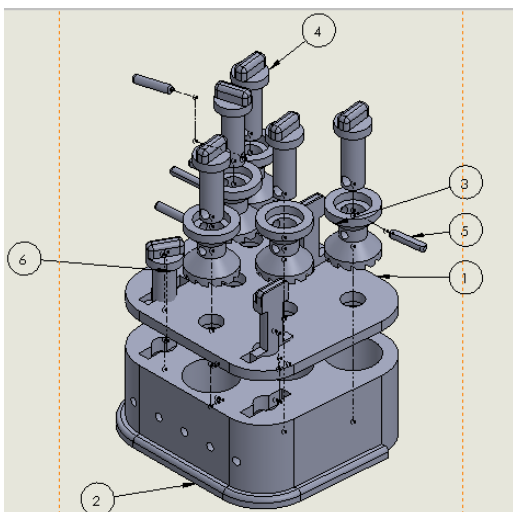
Ratcheting Tensioning Mechanism Exploded View
